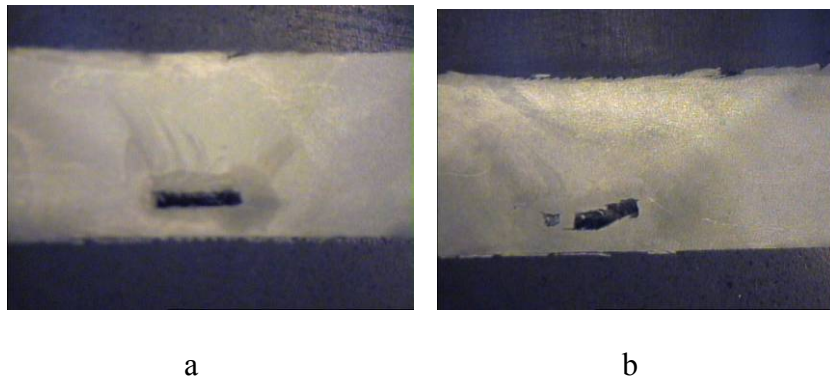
Macrographs of welds with self-optimized tool shape. a) 1350 rpm/10 ipm, b) 1000 rpm/10 ipm.
